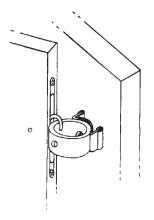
A 'OD' Receiver & Wall Bracket BRLOR attach panels to walls at variable angles
